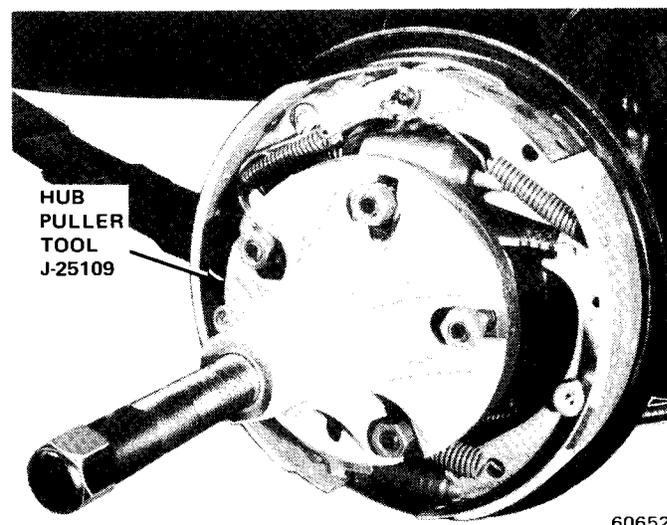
Removing Rear Axle Hub—CJ Models
